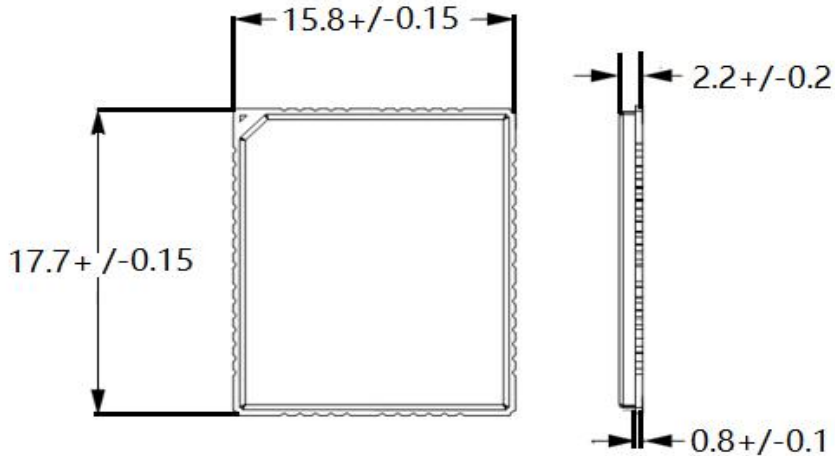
front view and side view of LPM2100 mg module (unit MM)
